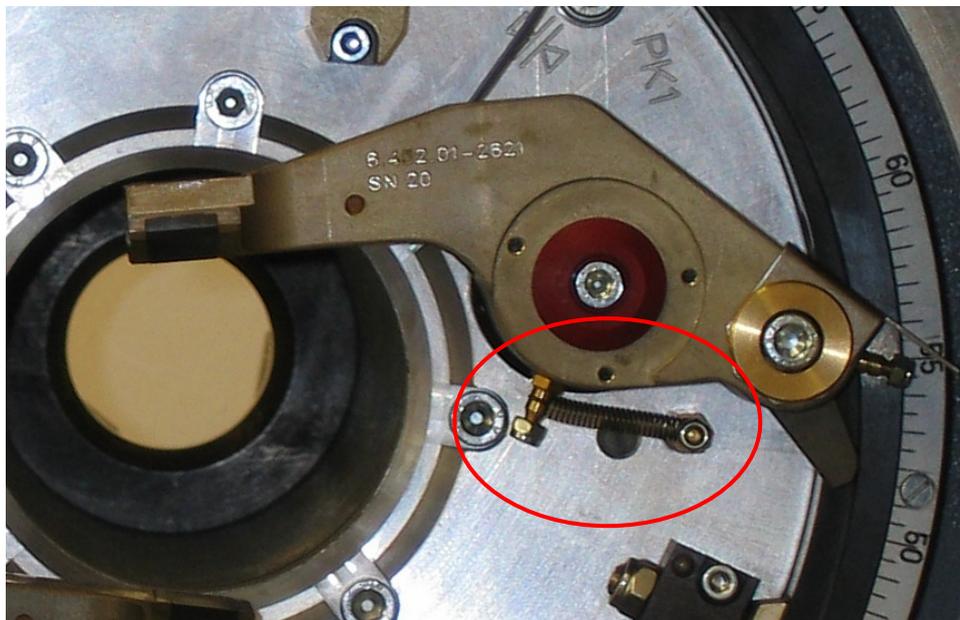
Test heads fitted, lid (7) not assembled, spring in standard position
